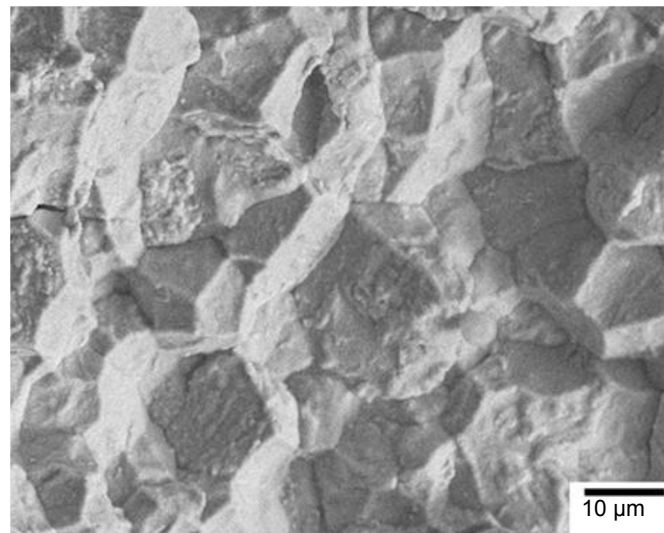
Brittle intergranular fracture surface of cadmium plated steel screws [15]
